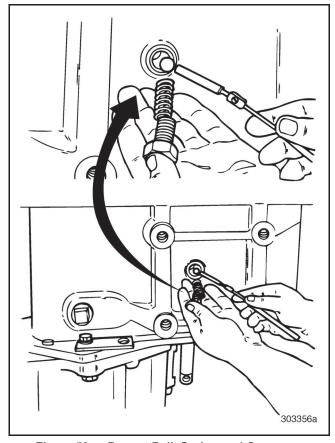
Poppet Ball, Spring and Capscrew Removed
